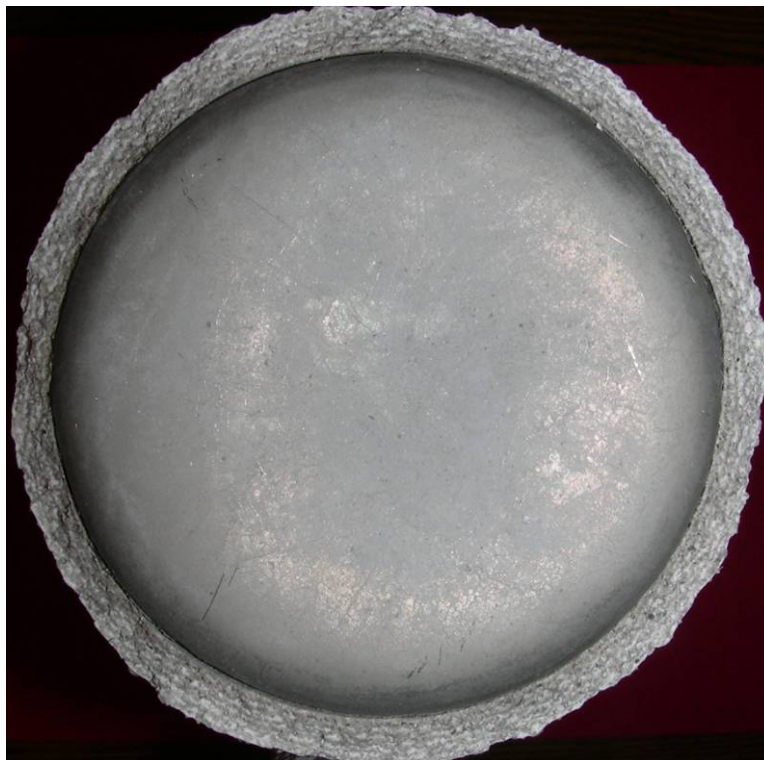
c) No dross on the surface of pouring basin of CMSX-4 casting with hot tear defect.
